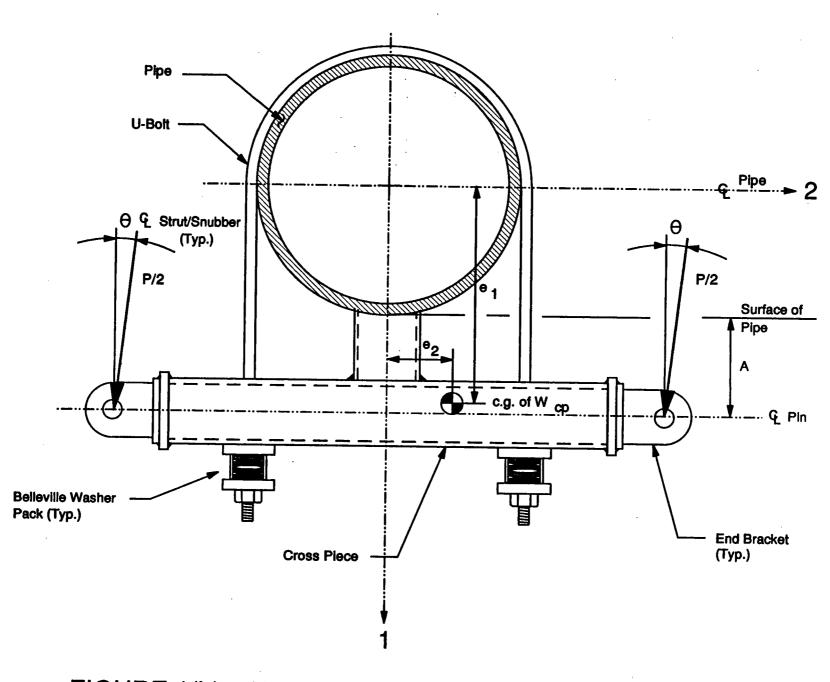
(a): U-Bolt Assembly w/Single Strut
